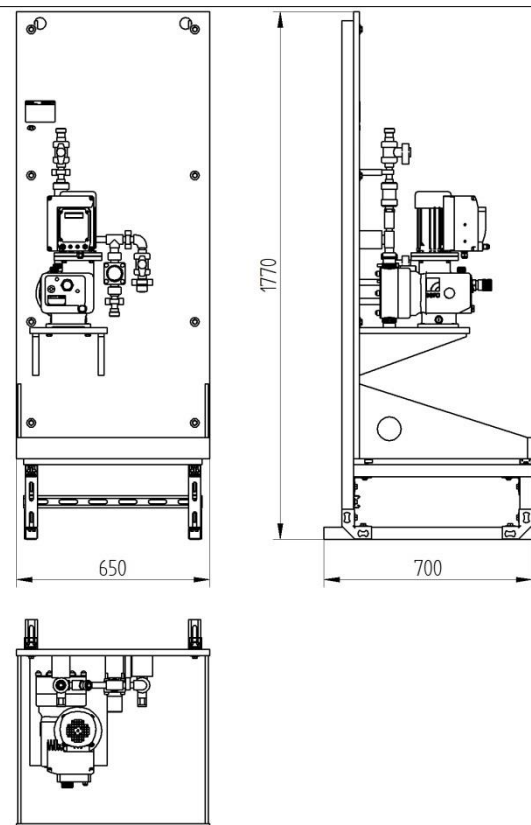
Dimensions of the CVD1 (floor mounting, steel stand)
